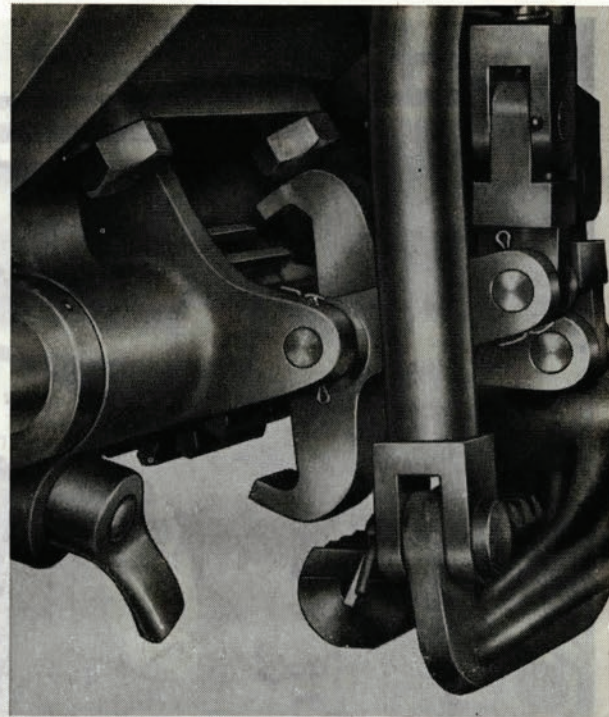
Position of Dog on Hand Operating Shaft—Drain Valve and Muzzle Door Interlock Lever at DRAIN VALVE LOCKED.
